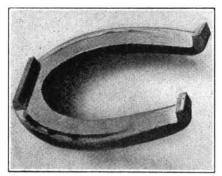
A WELL FORMED, WELL CALKED SHOE
